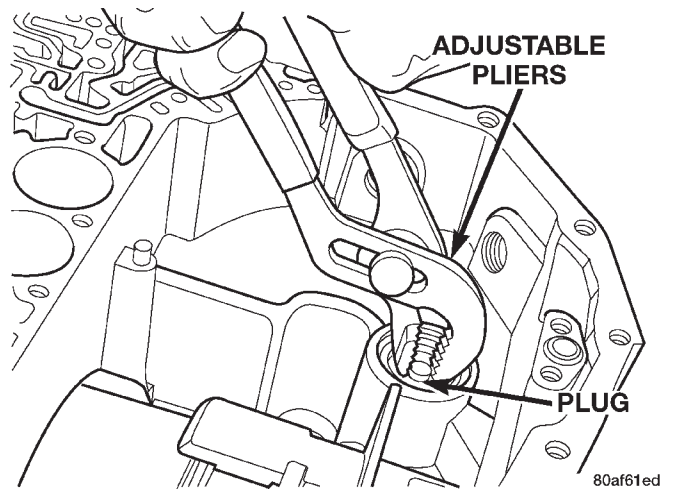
Install Low/Reverse Accumulator Plug (Cover)
